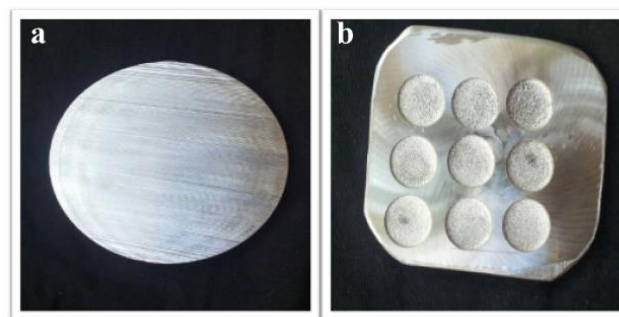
The workpieces before and after machining on EDM for various input process parameters.
